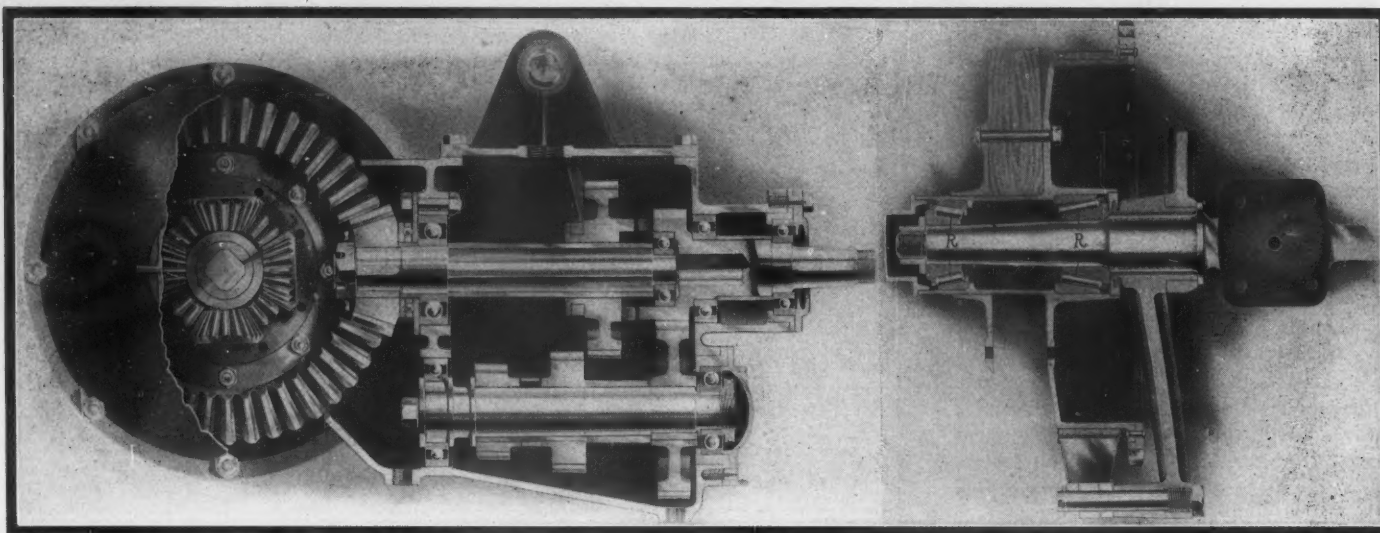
SHOWING A VERTICAL SIDE SECTION OF CLARK TRANSMISSION GEARING, AND ROLLER BEARING EMPLOYED IN WHEELS
